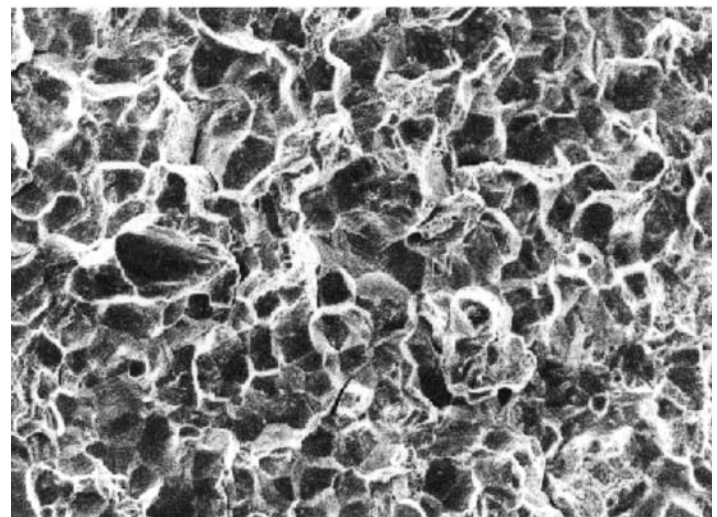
SEM fractograph of the failed screw showing intergranular fracture facets with partially formed dimples
